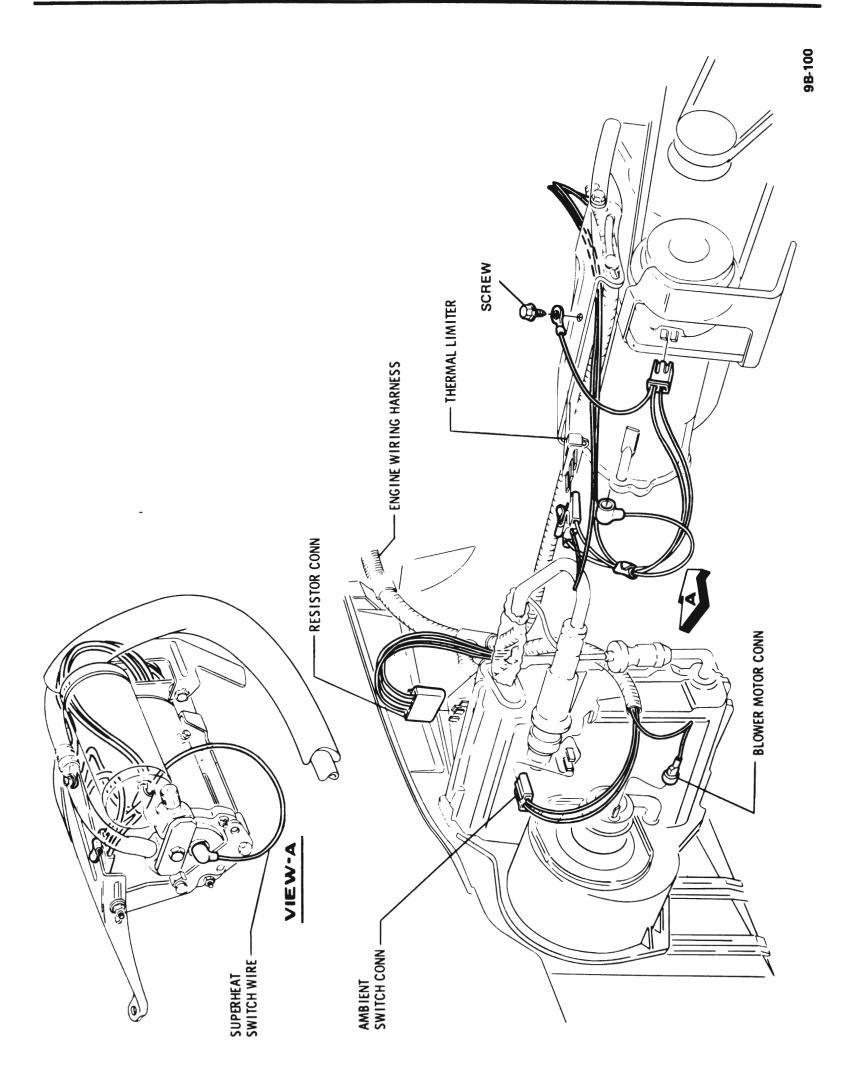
B-116 A/C Blower Motor and Compressor Wiring - A Series
